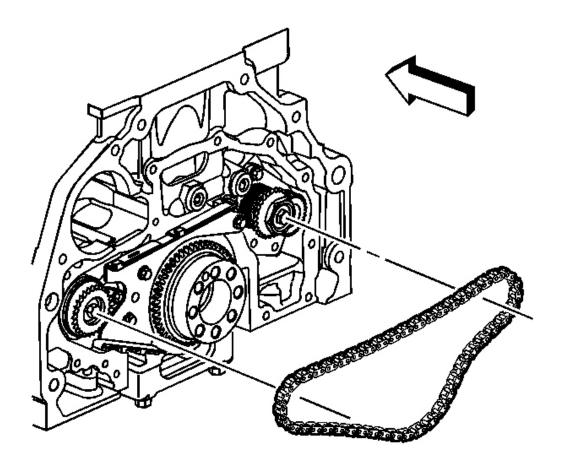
View Of Balance Shaft Drive Chain Courtesy of GENERAL MOTORS CORP.
